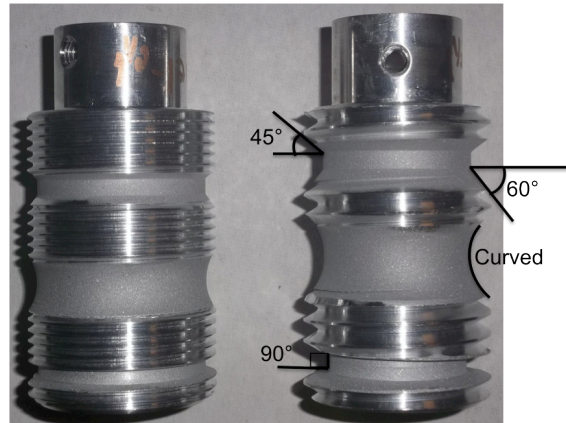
Fine (1.5-12UNF-3A) (left) and coarse (1.5-6UNC-3A) (right) threads machined in Al6061-T6. Threaded sections have been machined down to produce surfaces with angles of 45° , 60° , 90° and curved. These specific regions have been grit blasted prior to the dimensional restoration procedure.
